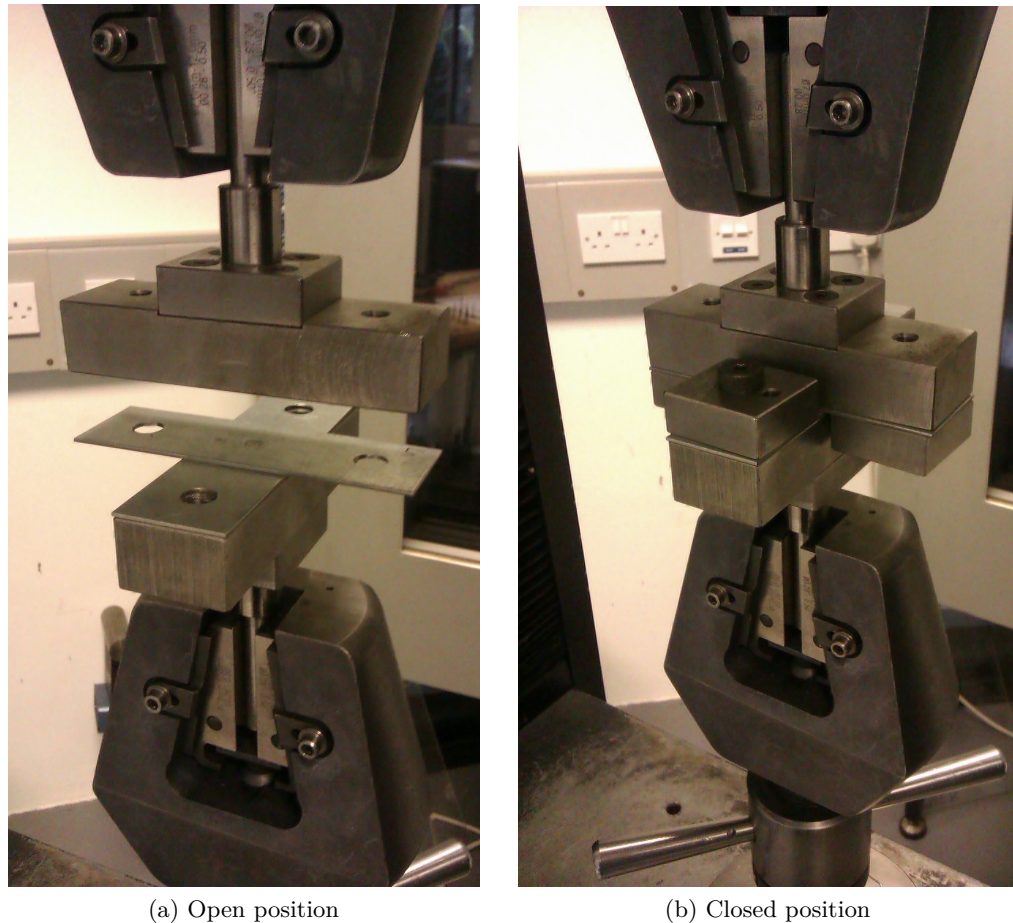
Cross-tension clamps fitted to tensile testing machine
